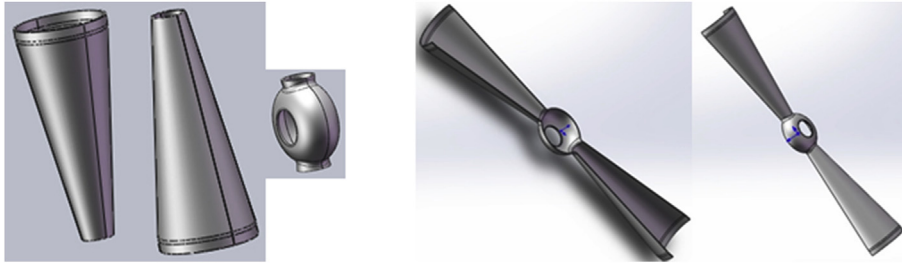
Inner conductor welding scheme adopted by Harbin Institute of Technology (left) and Ningxia OTIC (right).
